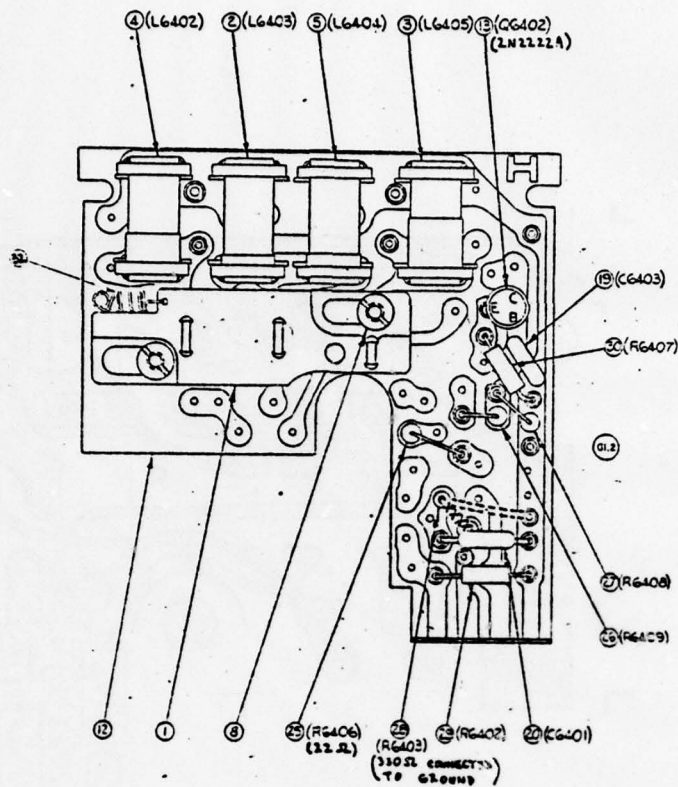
P.C. BOARD LAYOUT FOR THE A6400A TRANSMITTER
